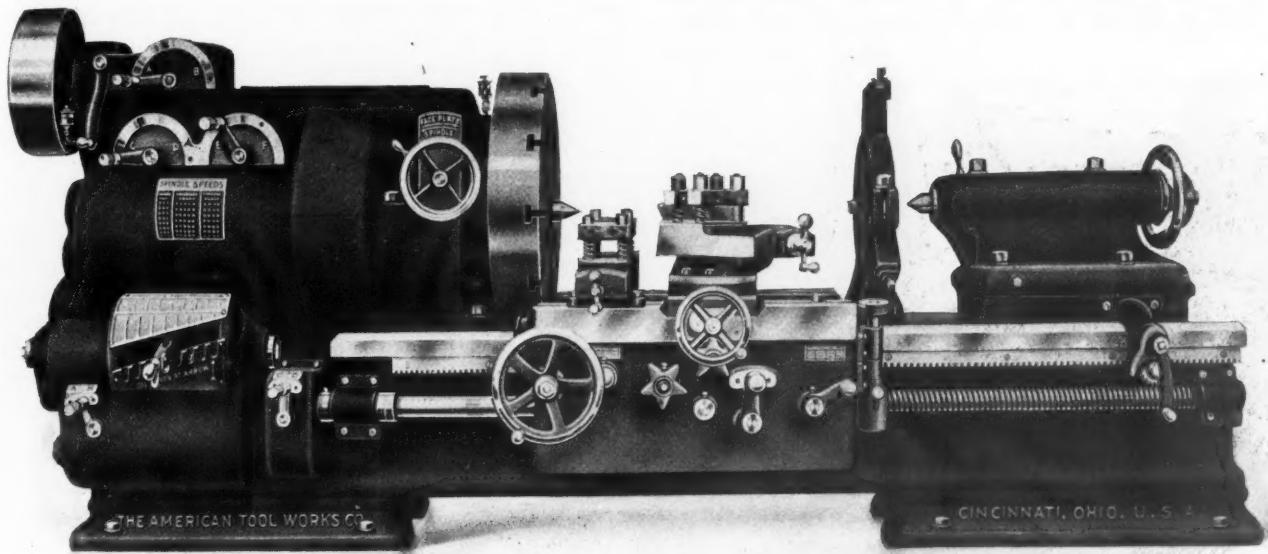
High-duty Lathe, built by the American Tool Works Co.
